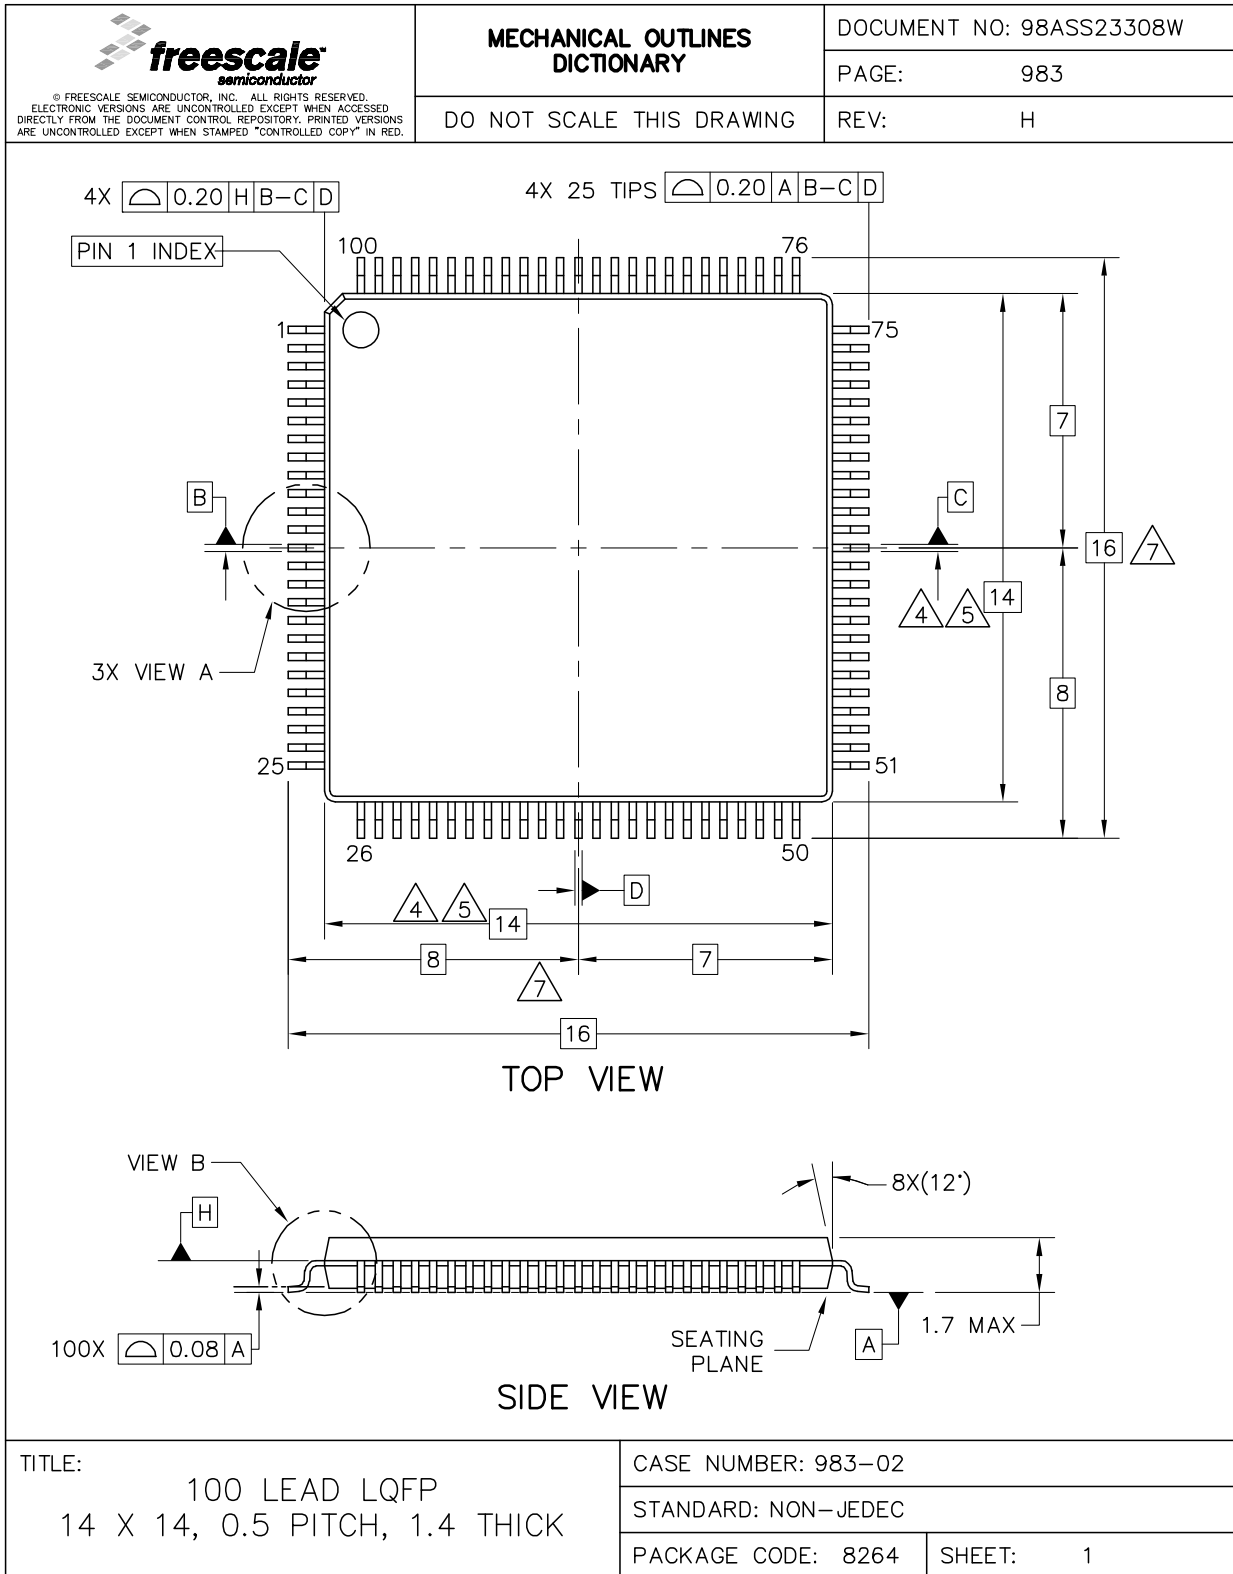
100 LQFP package mechanical drawing (part 1 of 3)
